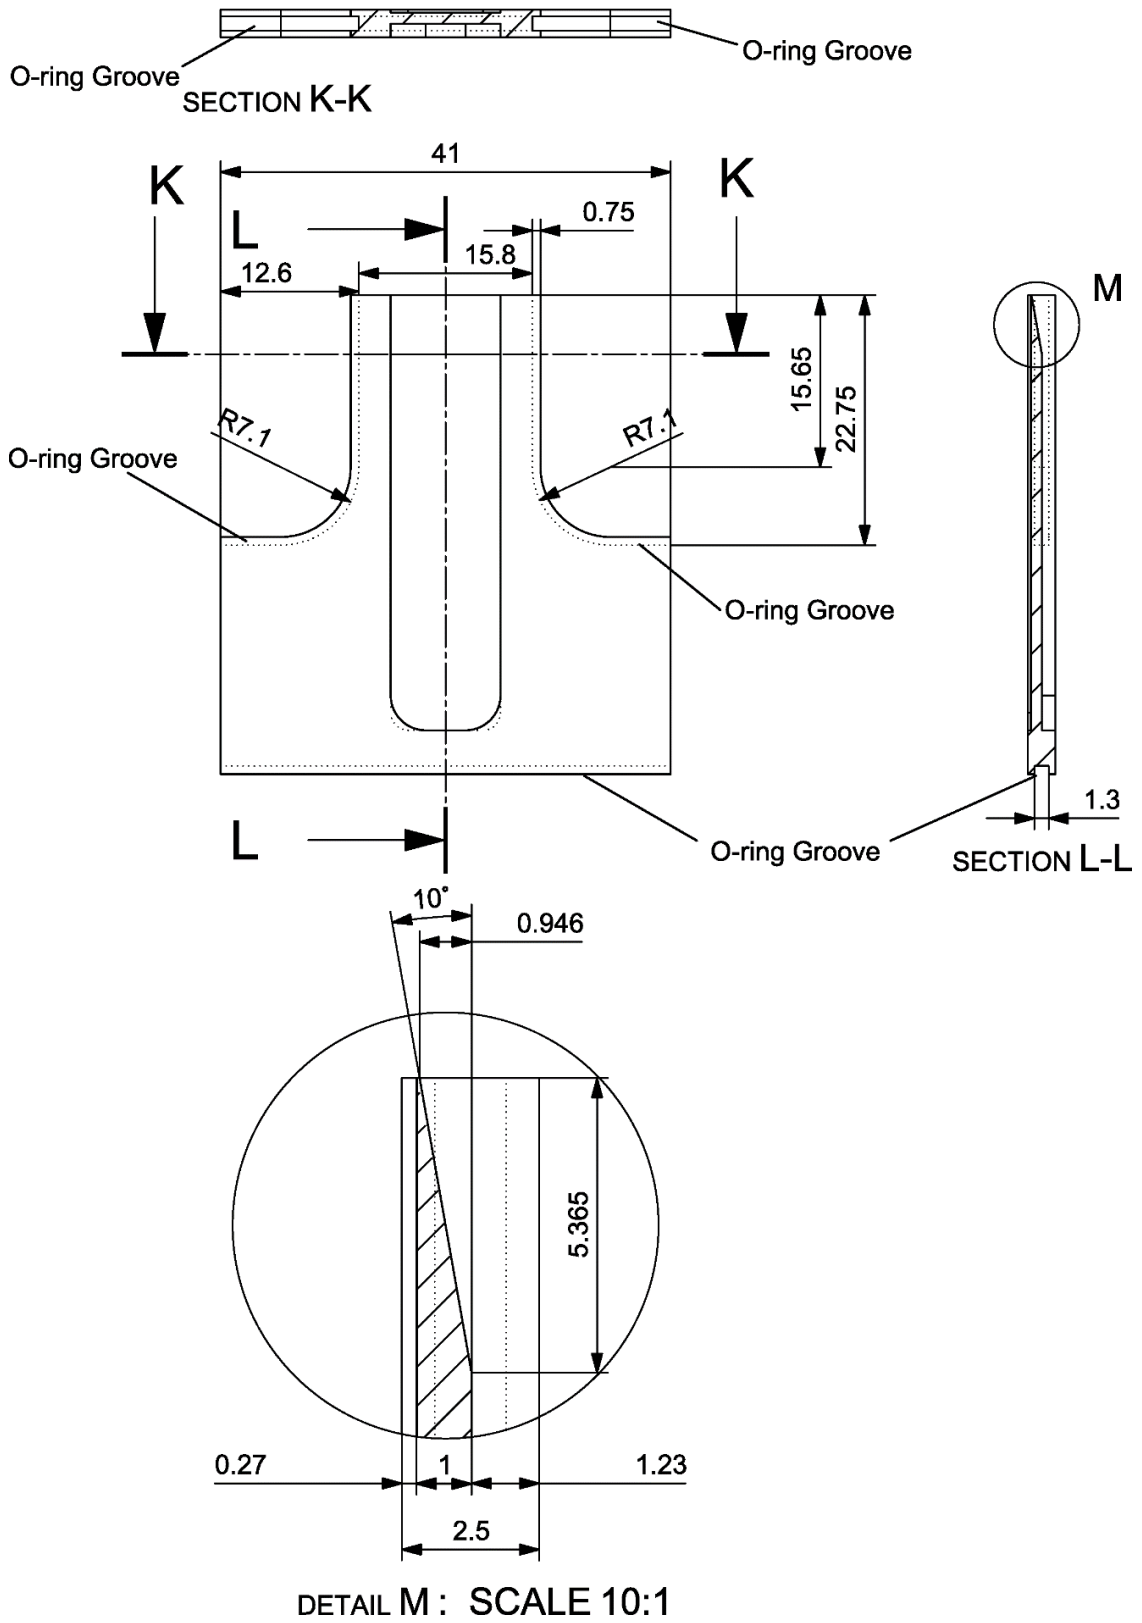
Test-Section Separator Plate Sample CAD Drawing. Dimensions are in millimeters.
